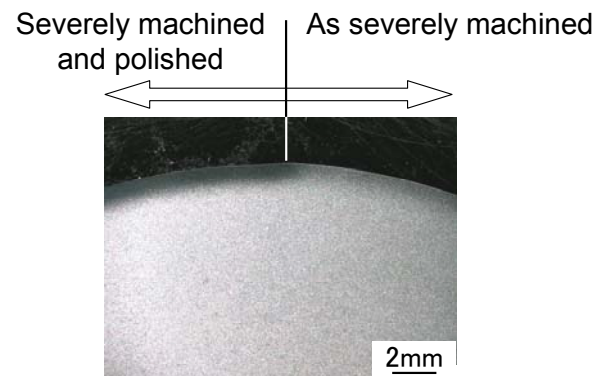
Carburized SCM420Nb specimen after severe machining(right hand side) and then polished(left hand side).
